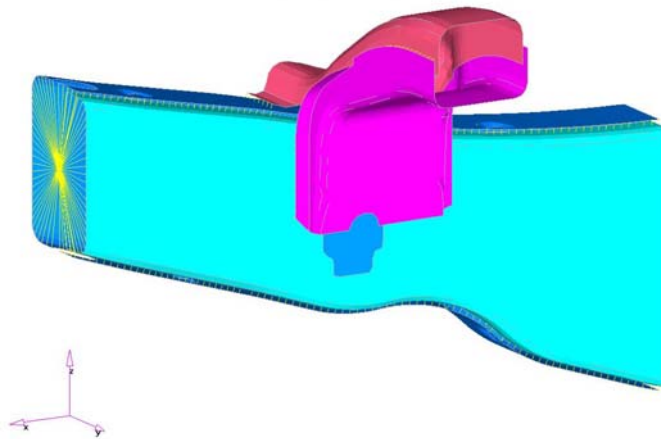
Joint 4: Alligator to Box Section (welded to both flanges)
